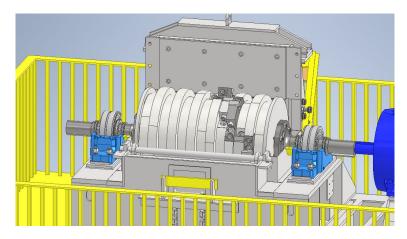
Rotor and Bearing Units Resting in Lower Housing
